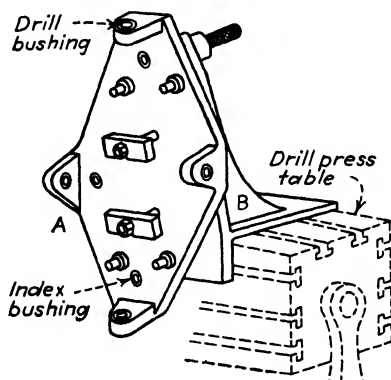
This type of rotary jig fastens to the drill press table. Body *A*, supported by angle plate *B*, rotates and is indexed by pin and bushings shown.
